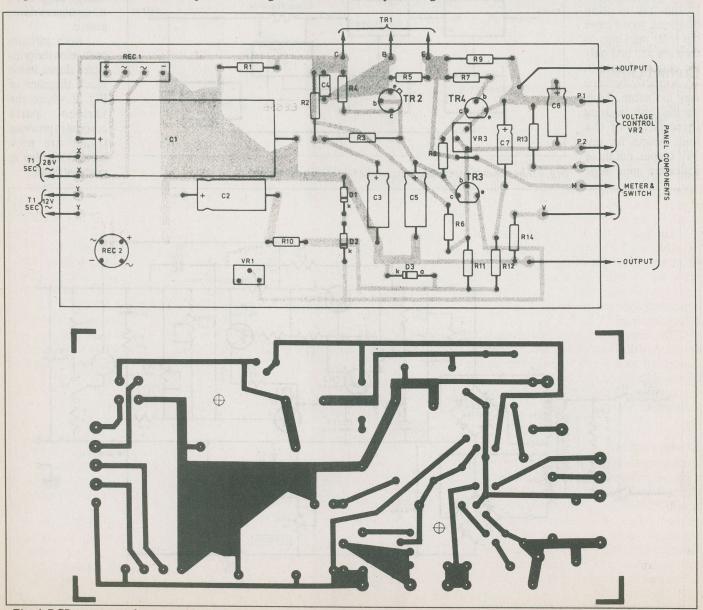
PCB component layout and full sized copper foil pattern. Drill mounting holes to suit mounting spacers.
